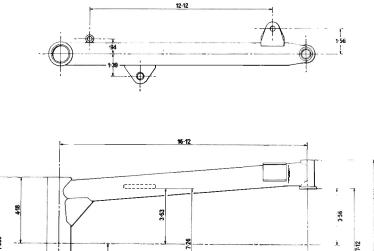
Swinging arm dimensions (All dimensions are in inches)
